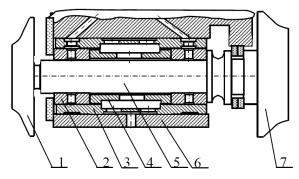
The design of the rotor on multilayer bearings: 1 – compressor's wheel, 2 – floating rotating ring, 3 – floating non-rotating ring, 4 - stopper ring, 5 – rotor, 6 – hull, 7 – turbine's wheel.
